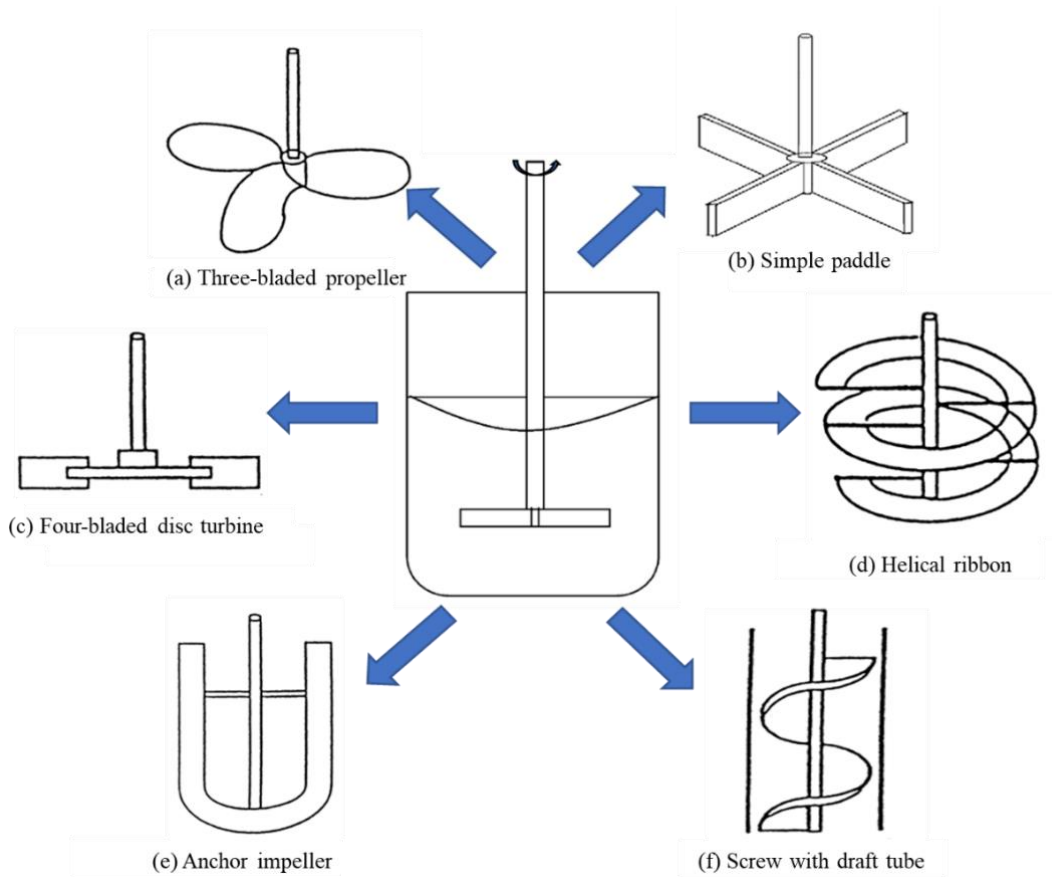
Shapes of stirrer for stir casting [28] [29]
